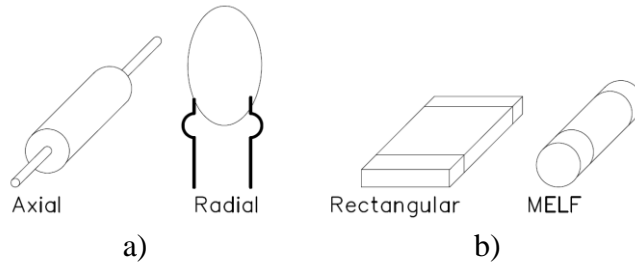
Most common passive component package types. a) Axial and radial PTH components. b) Rectangular and MELF SMD components. [3]
